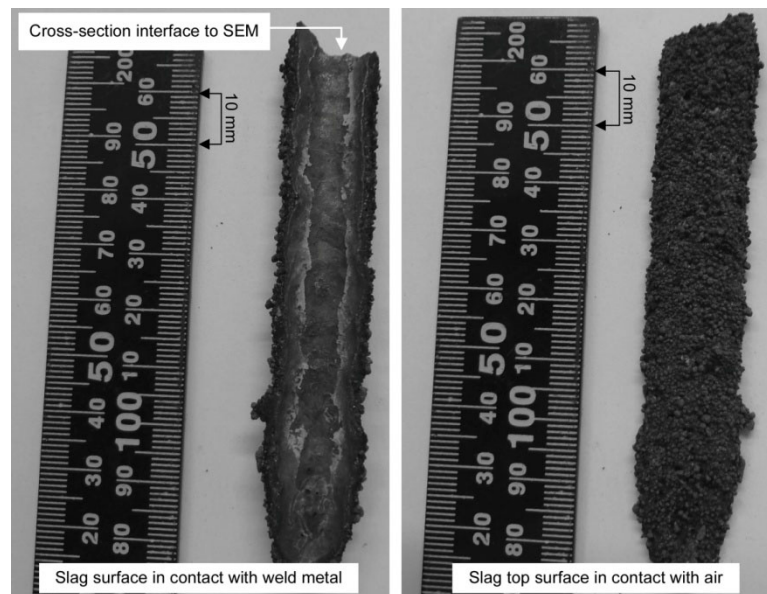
Photographs of post-weld slag ribbon from MP9 weld.
